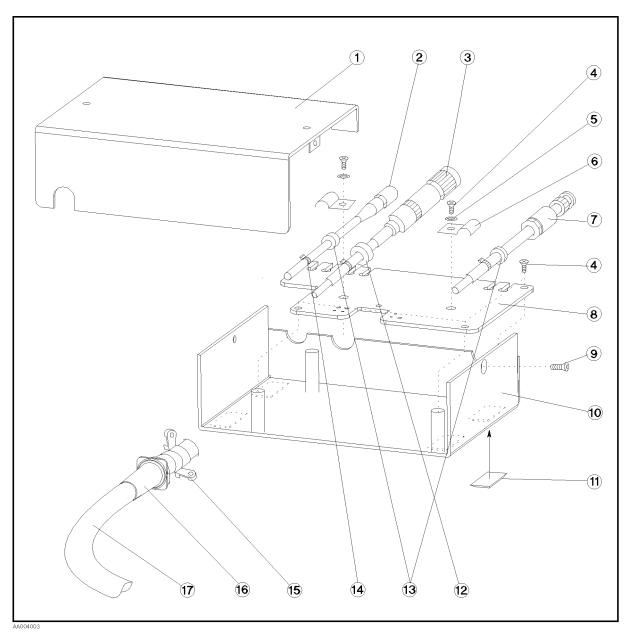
Replaceable Mechanical Parts Identifier (2 of 2)
